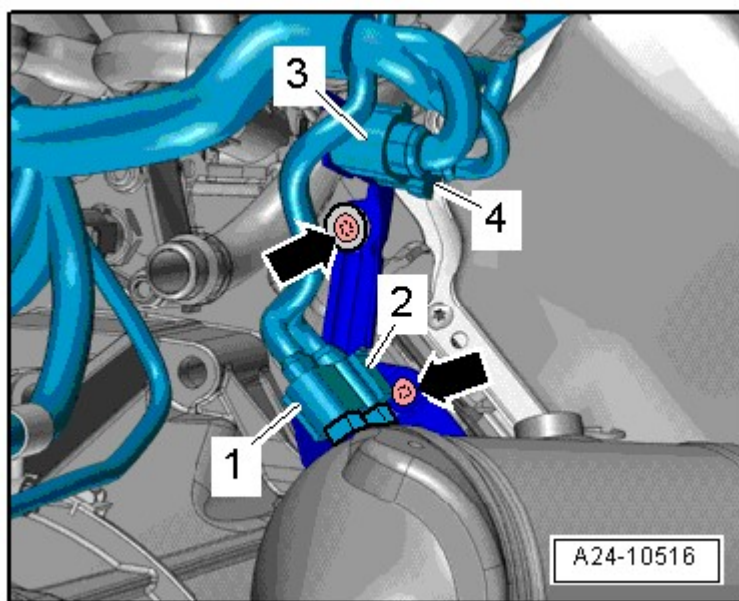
Identifying Bolts -Arrows- And Right Connector Bracket
